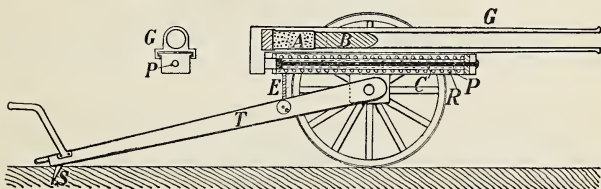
Mechanism of a field gun. A , charge; B , shell; G , gun supported on cradle on which it slides; C , inner cylinder containing oil, which recoils with gun; P , stationary piston with holes through which oil passes slowly to check recoil; R , running-up spring coiled around C ; E , elevating screw; T , trail; S , spade.
